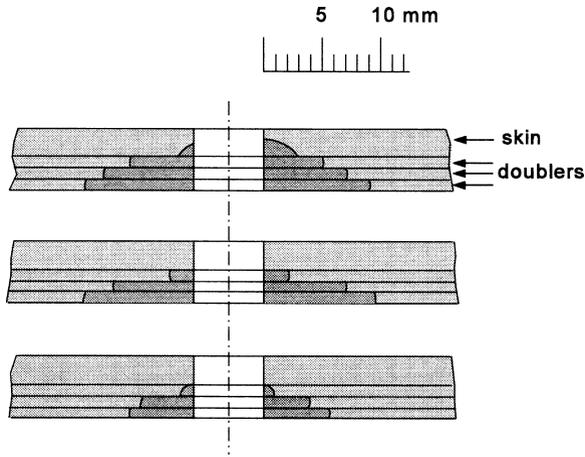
Fatigue crack nuclei at three fastener holes of the joint in Figure 21.4. Small or no crack nuclei in skin.
